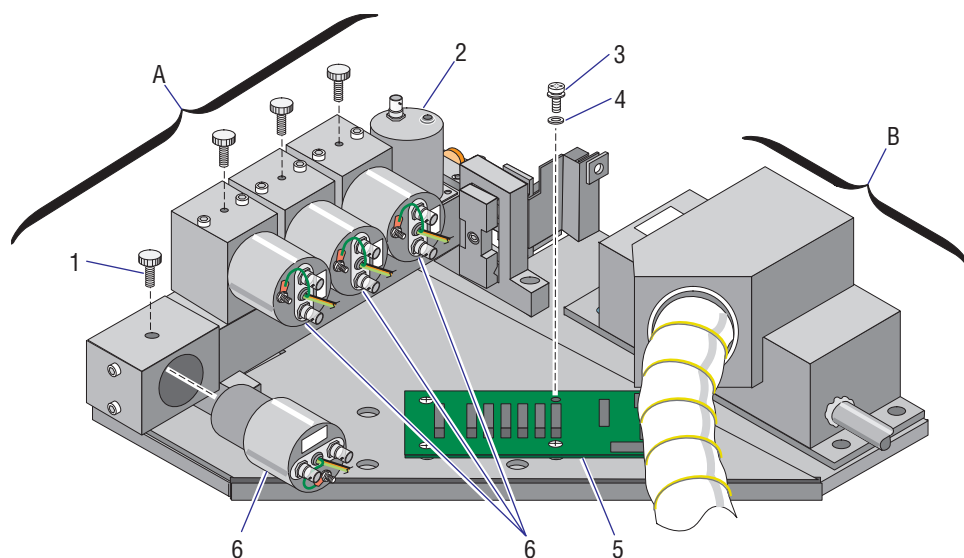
Quick Disconnects Below Upper Pneumatics Drawer (See Table 8.2-18)
